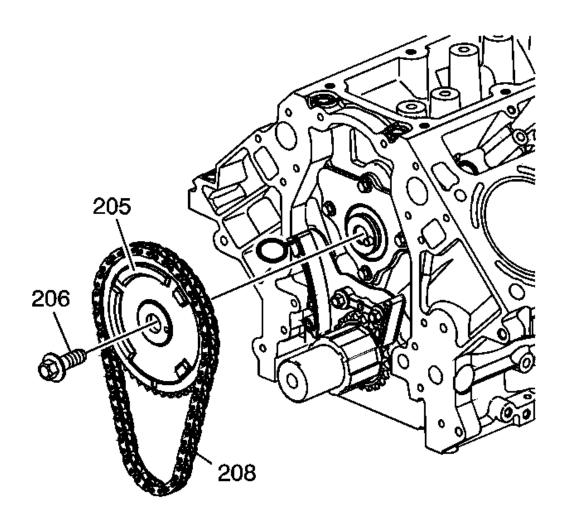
View Of Camshaft Sprocket & Timing Chain Courtesy of GENERAL MOTORS CORP.
